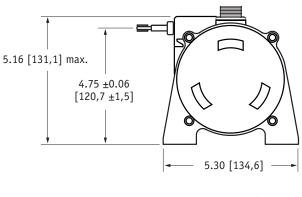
Outline Drawing (36 oz. cable tension only)
